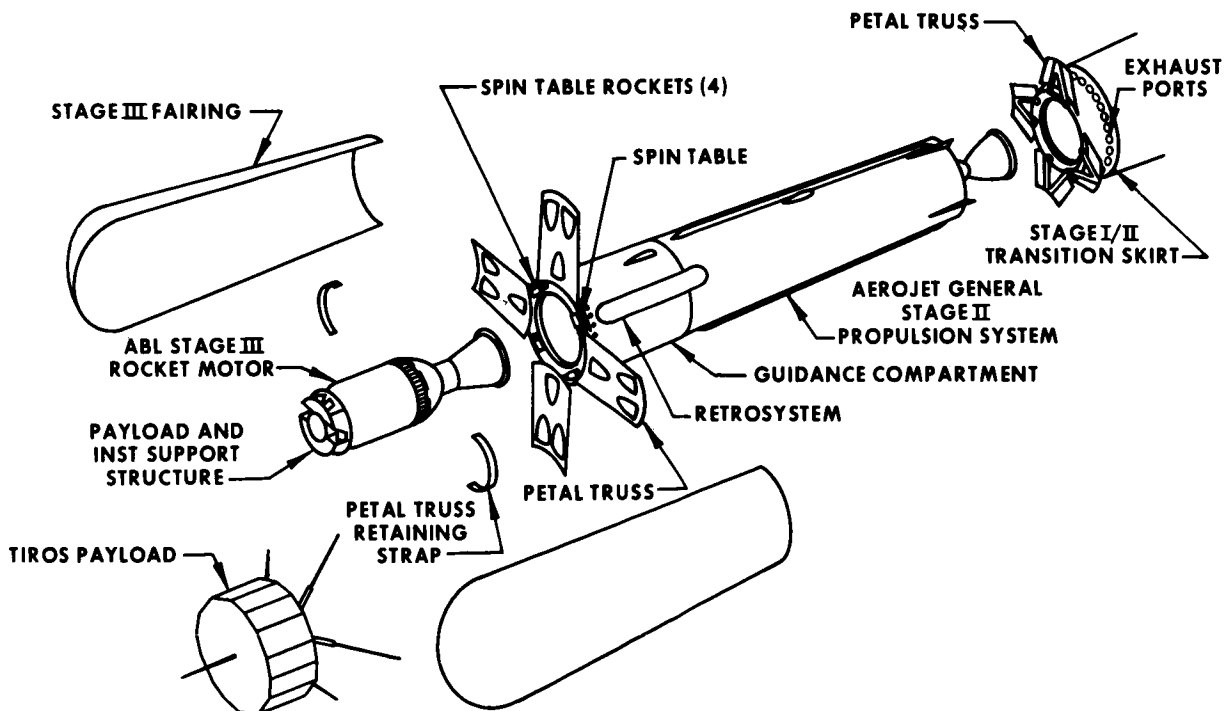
Second and third rocket stages and payload, exploded view.
